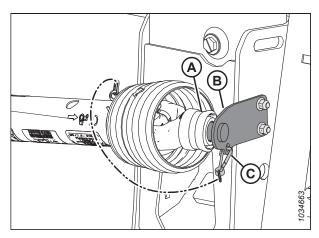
Driveline in Storage Position – Driveline B7038 or B7039
